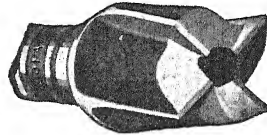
A Half-End View of the Eclipse Standard Counterbore Cutter.
